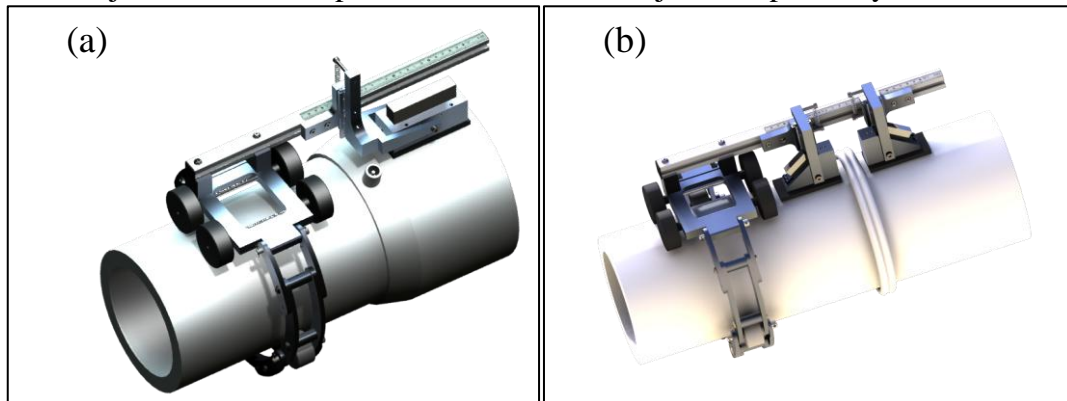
The flexible chain link scanner. (a) EF probe holder. (b) BF probe holder.
